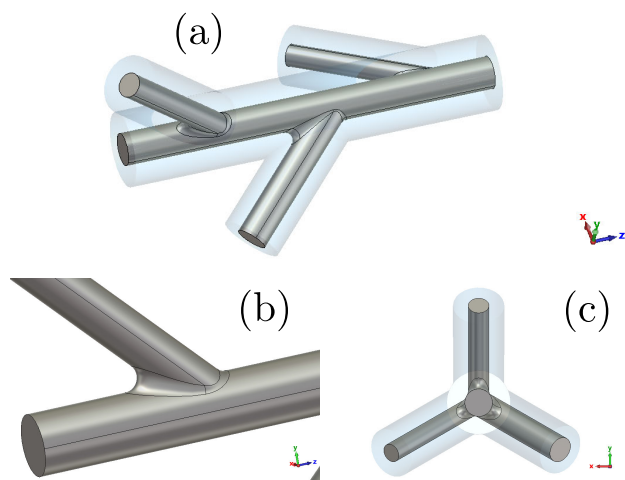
Some CAD model views of the stubs filter to be manufactured after connecting to the low-pass filter. (a) 3D view of the piece. (b) Detail of the rounded edges connecting a stub and the coaxial main line. (c) Bottom view to illustrate the stub distribution along the XY plane.
